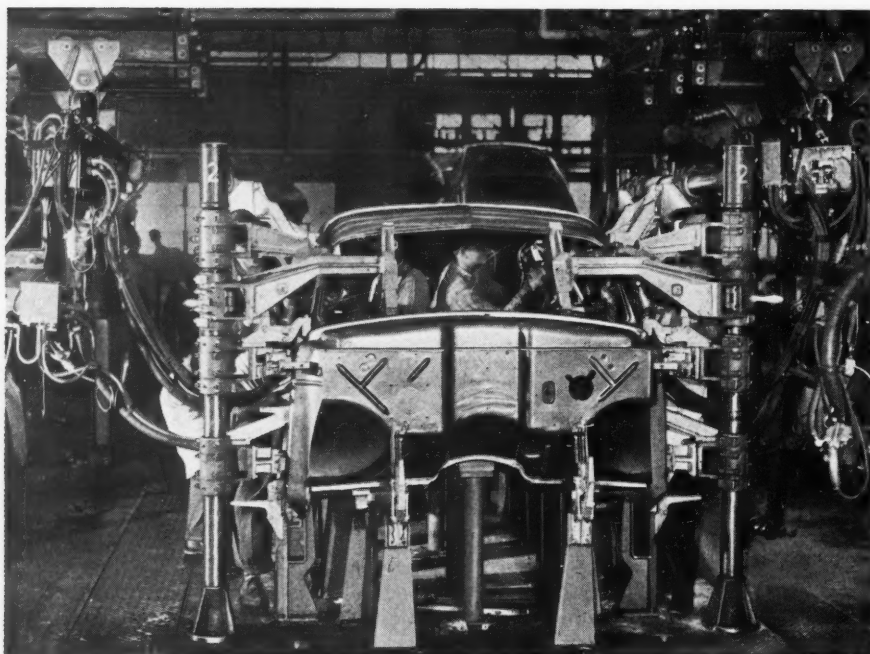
Front view of the fixture employed to build up the frame of the complete automobile body. Swinging gates pivot about horizontal and vertical shafts
